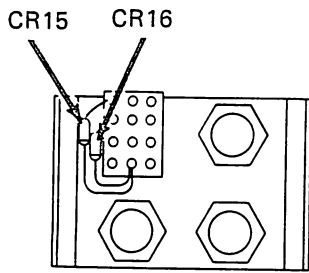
Chassis Subassembly Component Location Diagram (Sheet 2 of 6)
